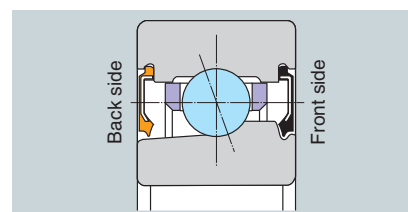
High-speed grease-lubricated sealed angular contact ball bearings
